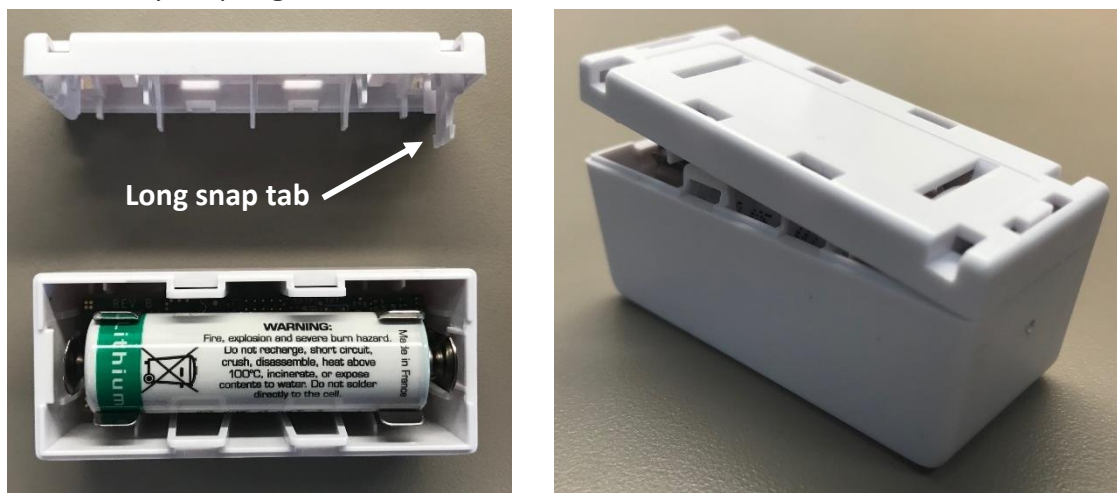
Left: Location of the Long Snap Tab. Right: Inserting the Long Snap Tab Side First to Reattach Enclosure Bottom.
